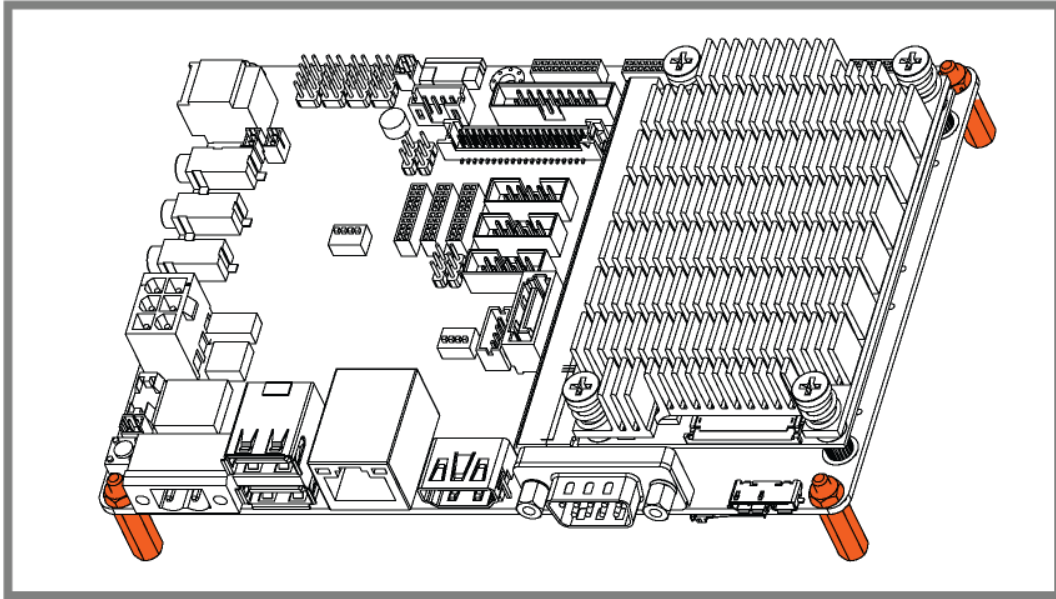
Step7 - Mount the 4 standoffs in the corner holes of the carrier board
